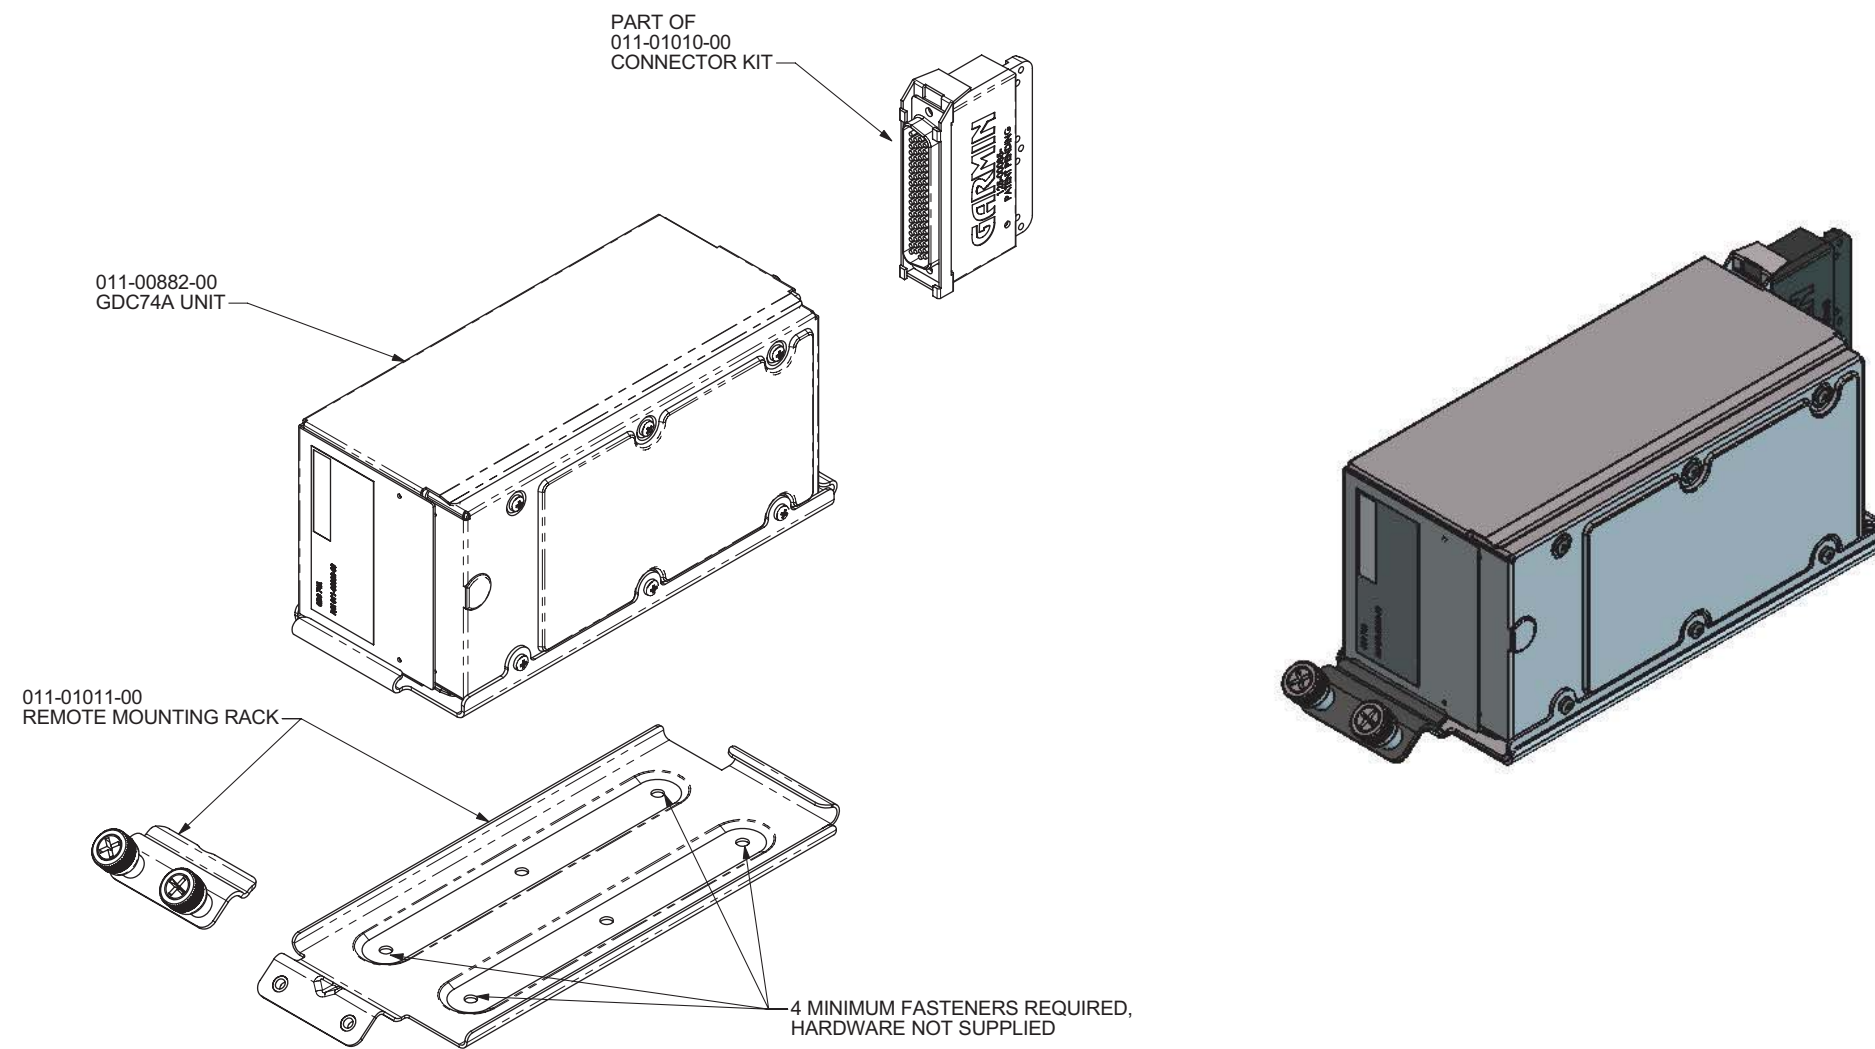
GDC 74A Outline Drawing for Remote Mounting Option I (Sheet 2)
